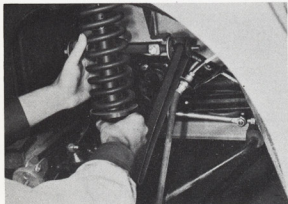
Removing Coil Spring & Shock Absorber V1341
